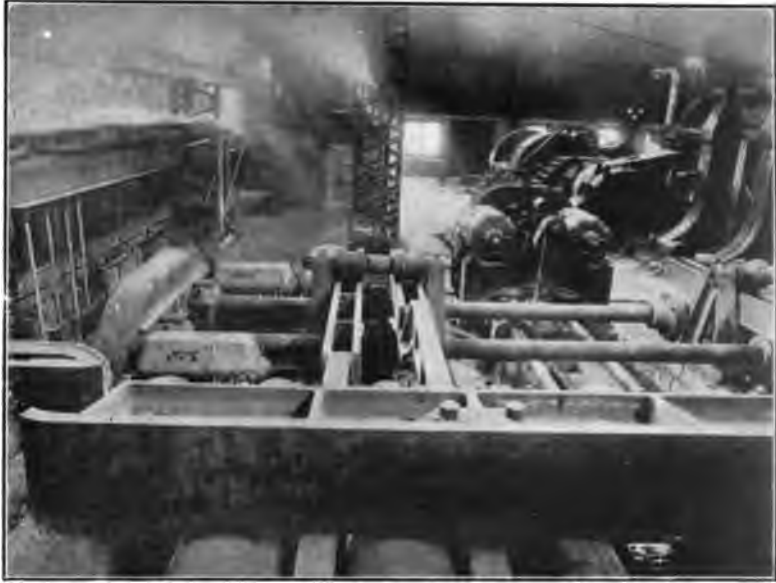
GENERAL VIEW OF OPERATING MECHANISM FOR MANIPULATOR FINGERS AND SIDE GUARDS
